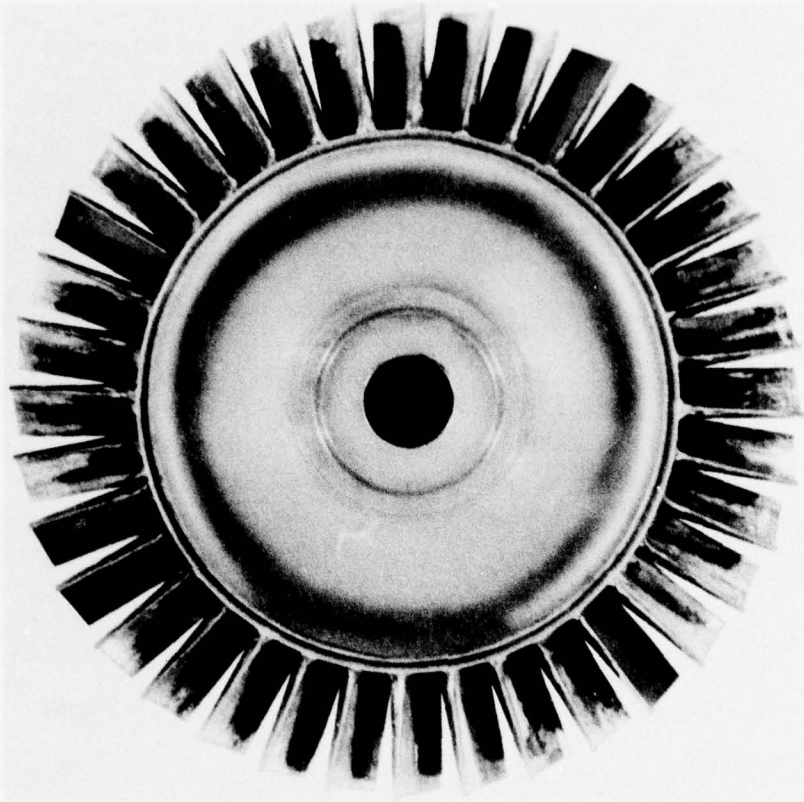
Finish Machined Duo-Density Turbine Rotor
